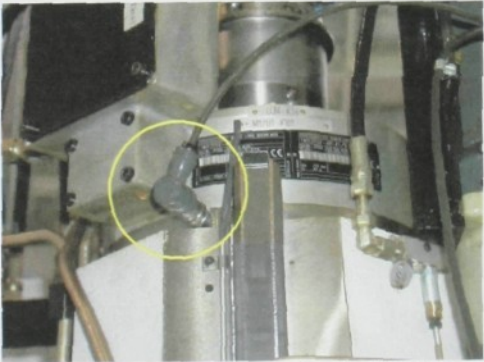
The sensor VIB 6.122 on spindle of EMAG machine tools
